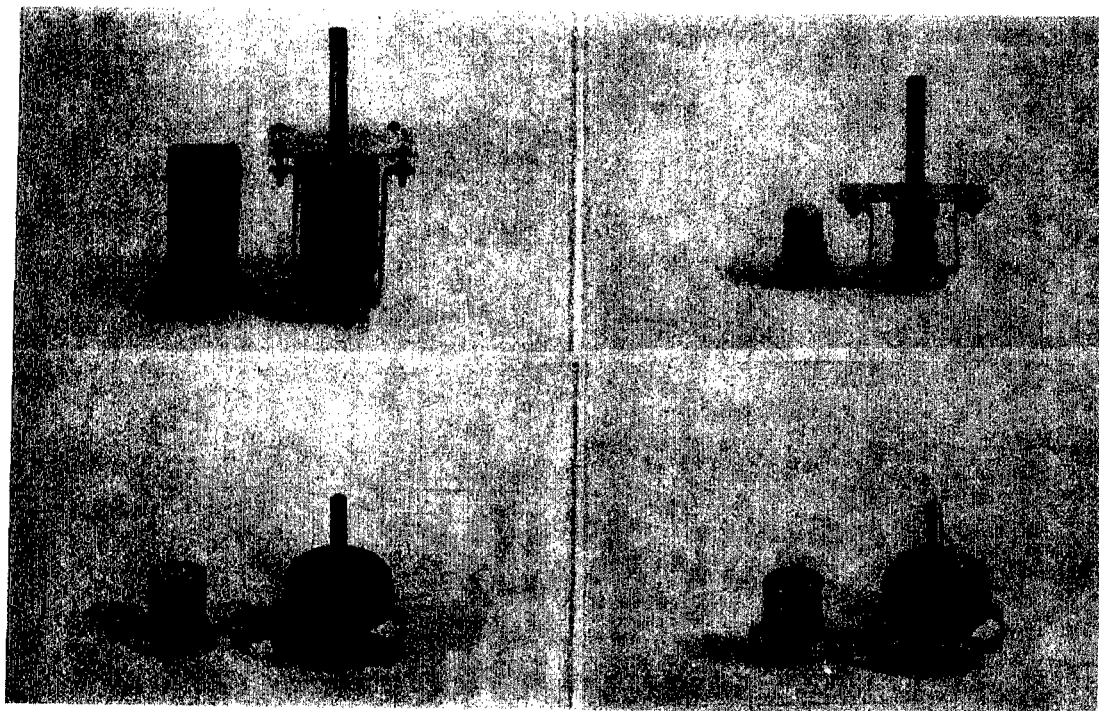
Two "O" Ring Adaptors for Providing Access to Inside of Component.
